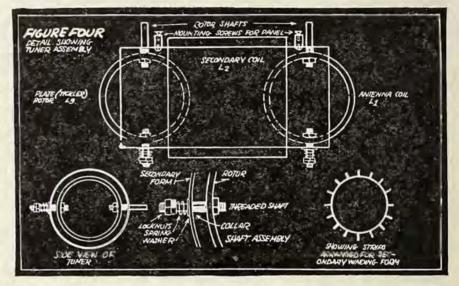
Details of the coupler are shown in the accompanying sketch. The top view shows the complete assembly of the coupler; the bottom left, a side view. The center bottom gives the details of the shaft and tension mounting, while the lower right gives an idea as to how the bakelite strips are fastened radially to the tube.
